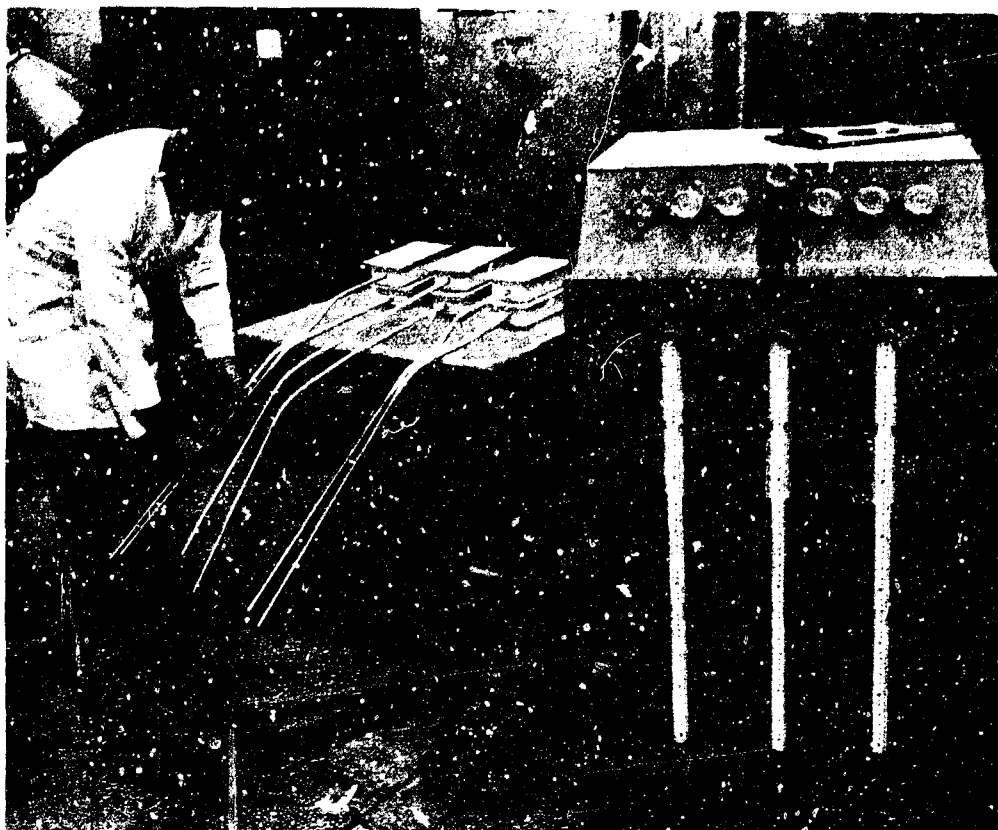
CYCLE PURGING AND PRESSURE CONTROL FIXTURES
